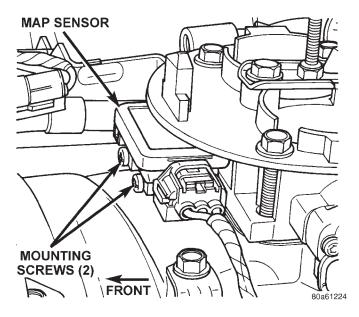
MAP Sensor Mounting Screws—5.2L/ 5.9LEngines
